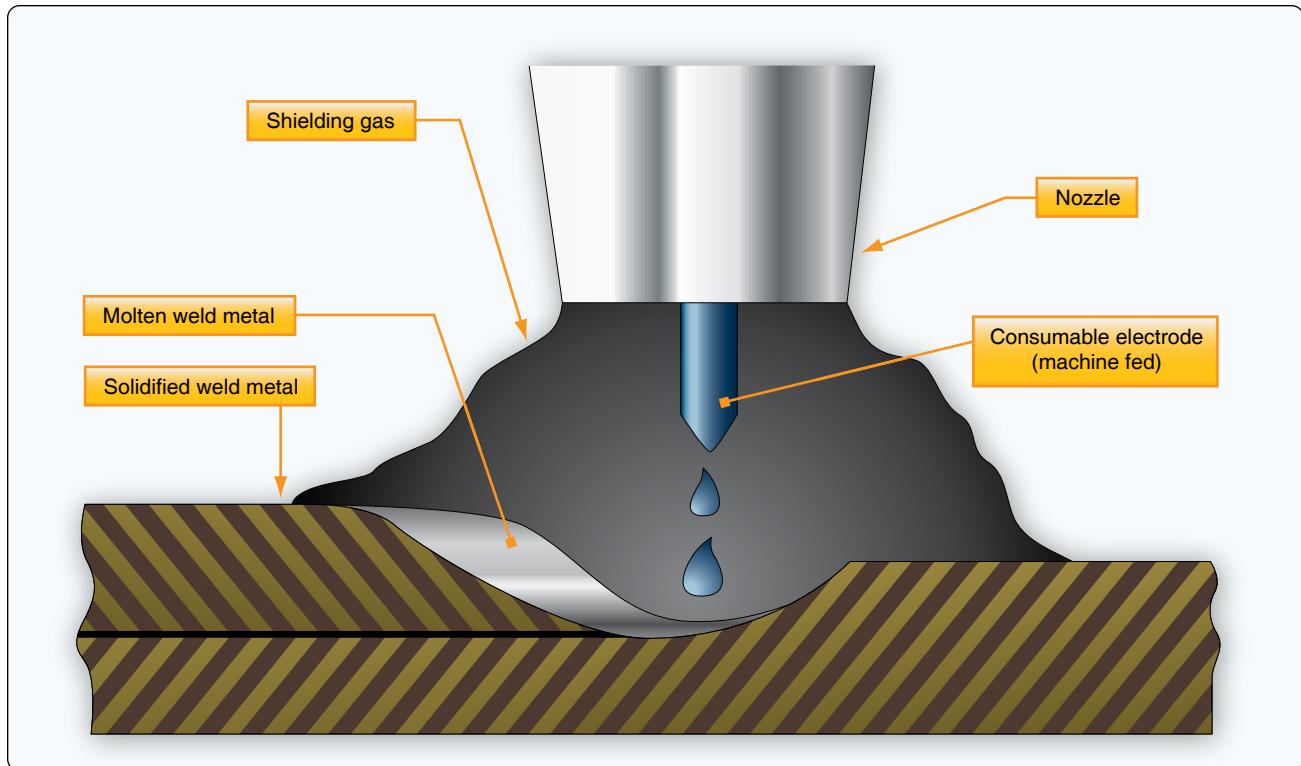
Metal inert gas (MIG) welding process.
